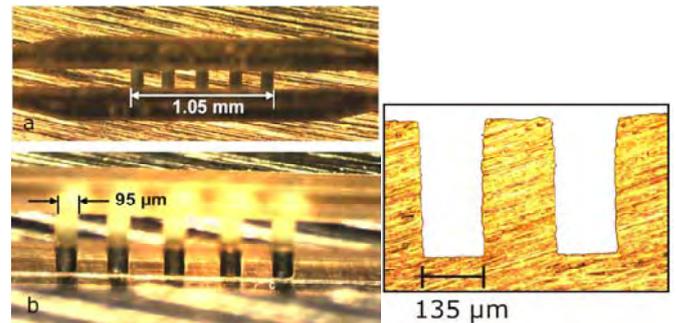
Microscopic view of CNC lathe machined metal branchline couplers. Right: (a) depicts a top and (b) a tilted side view of the 490 GHz structures. Right: Microscopic cross-section of the same branchline coupler. (Milling tool diameter: 100 μm, milling tool rotation speed: 70000 rpm)
